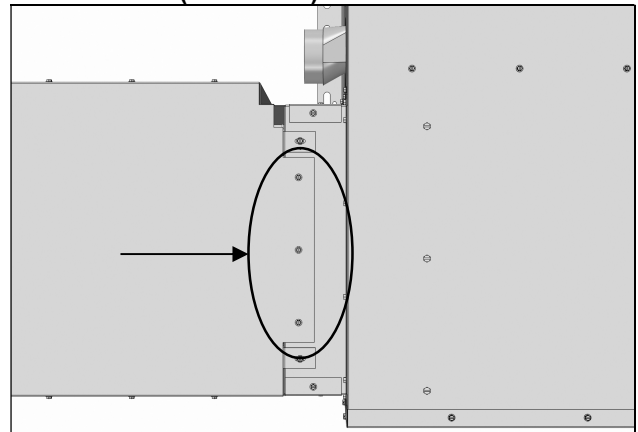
Blower Enclosure to Unit Attachment – Bottom View (HDB/HDC)
